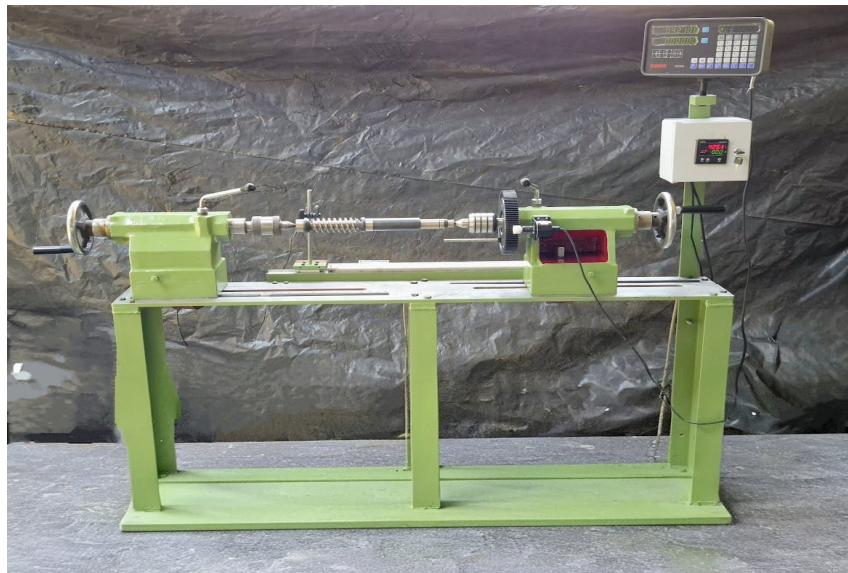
Experimental setup - Lead measurement of Worm gear inspection
